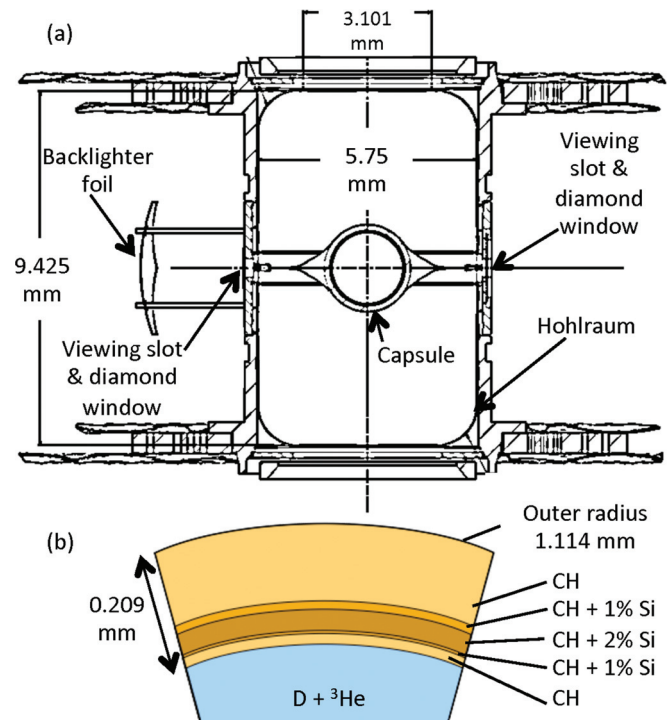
(a) Target design showing the position of the zinc backlighter foil and the viewing slots through the hohlraum. Hohlraum dimensions are given for one type of design (see Table III). (b) Schematic of ablator showing dimensions for a graded Si-doped capsule (see Table I).
